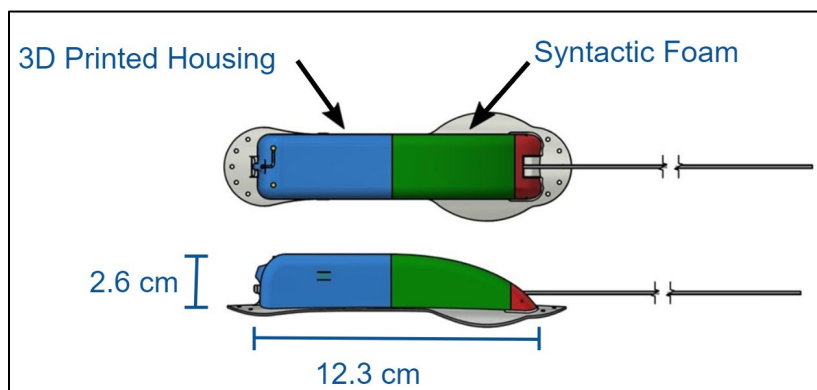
The existing sensor package and 3-D printed housing that is used for biologging squid. [4][5]
